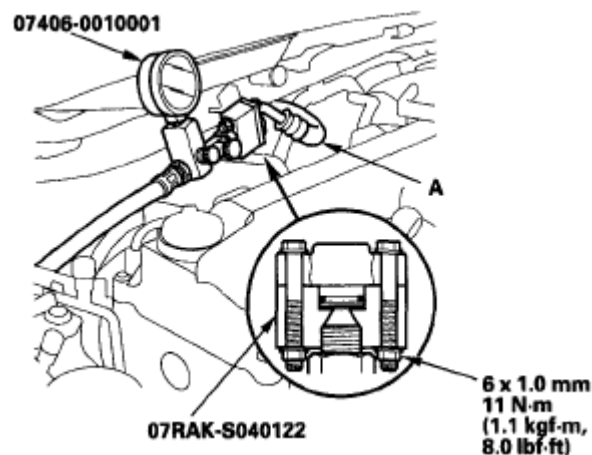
Identifying Pump Outlet Hose To P/S Joint Adapter (Hose) (With Torque Specifications)
